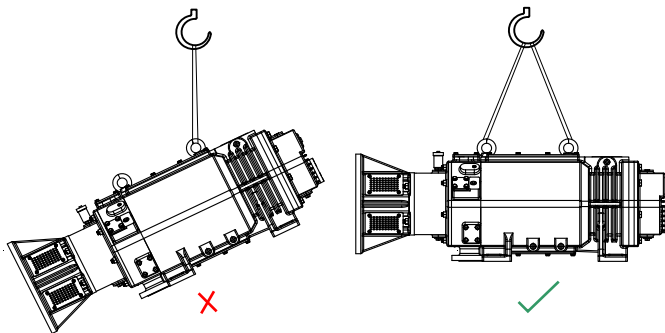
Careless lifting of screw pumps may be harmful to pump operation & workers.
